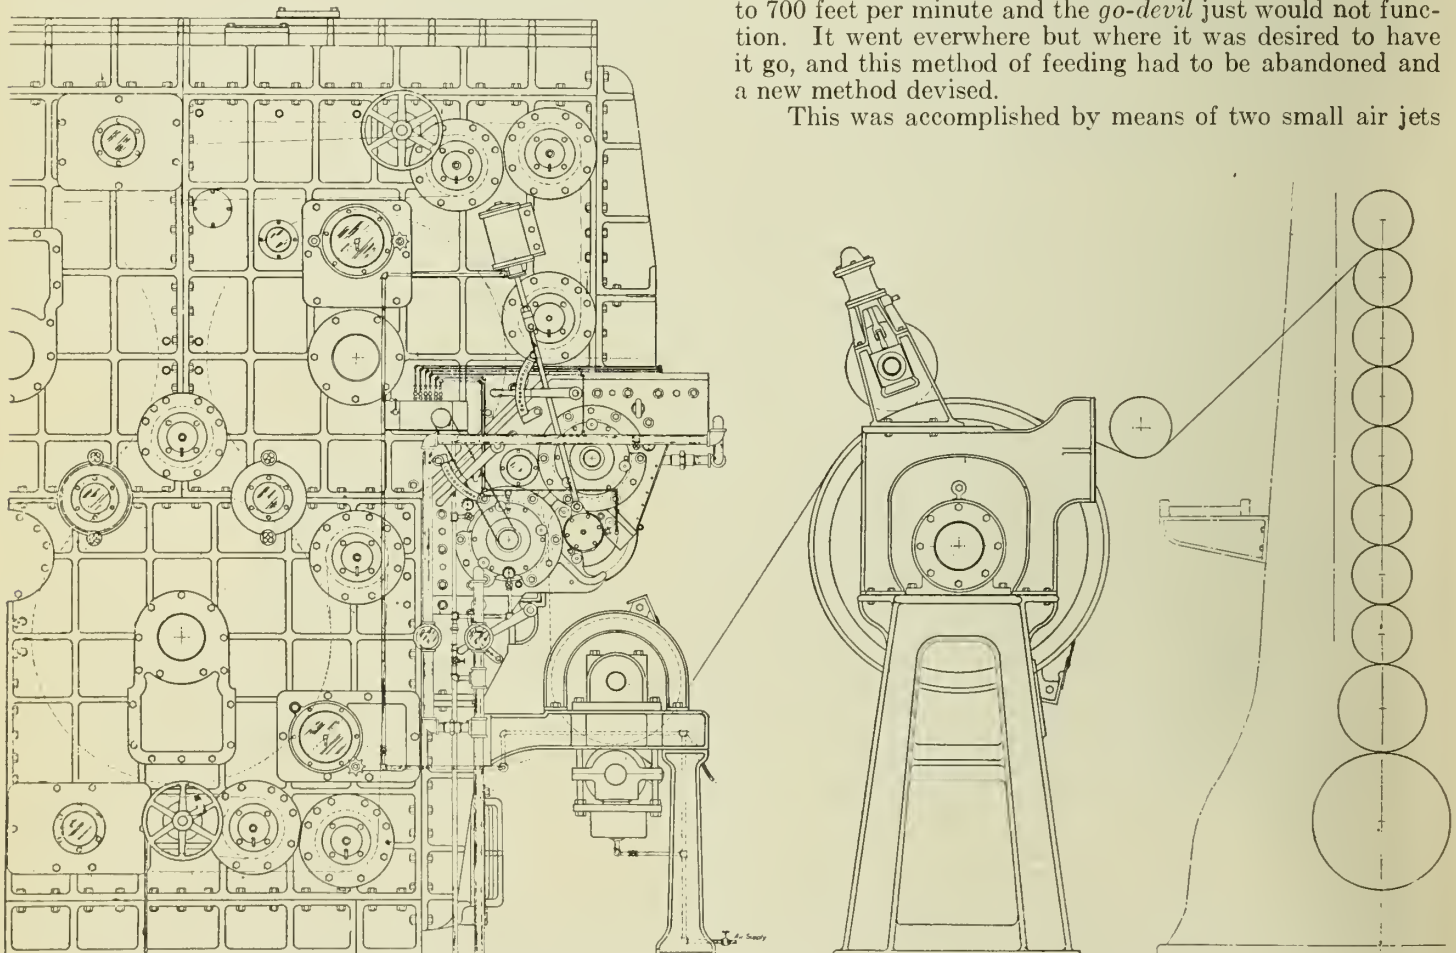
Vacuum Dryer Type 20-60-152, General Arrangement of Outgoing Seal and showing Sweat Dryers.
